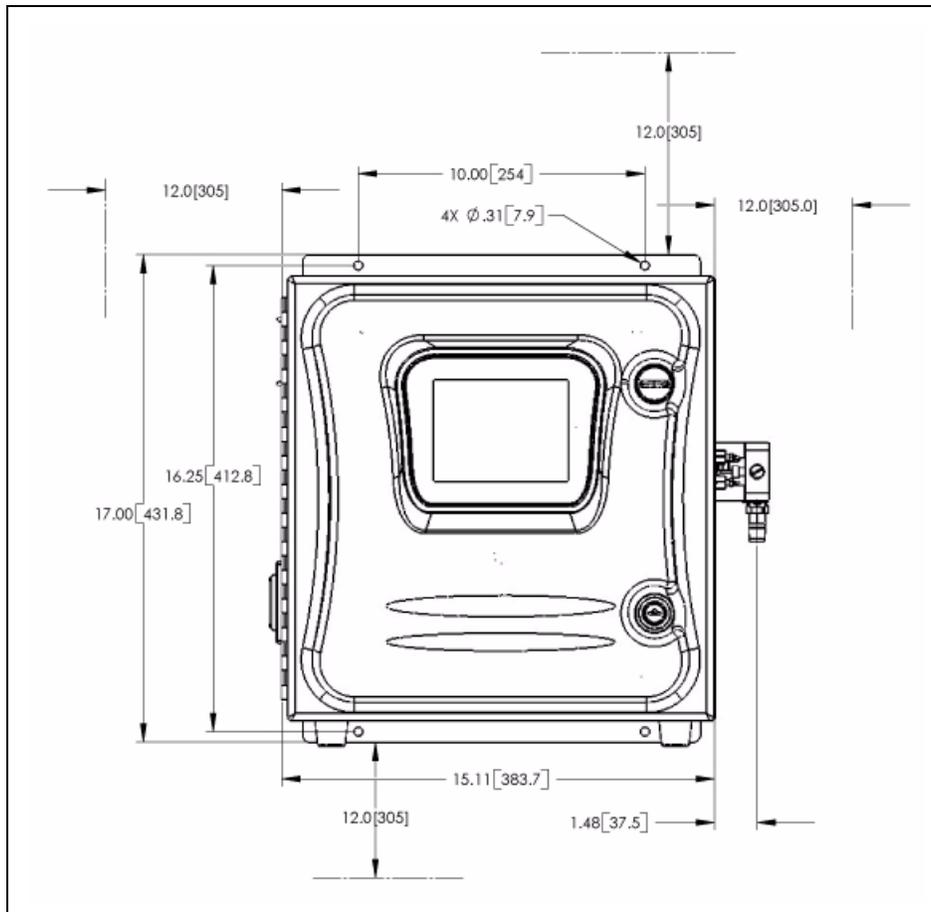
Analyzer Dimensions, with Sample Inlet Block
